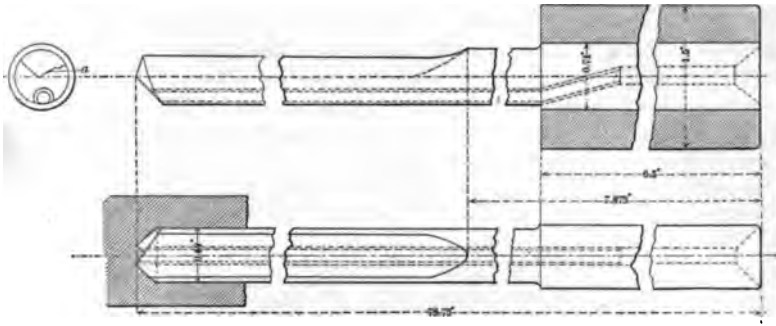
Type of Deep Hole Drill Gaged by Method shown in Figs. 40, 41 and 42
